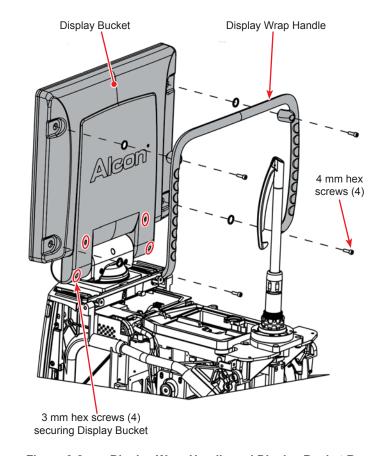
Display Wrap Handle and Display Bucket Removal
